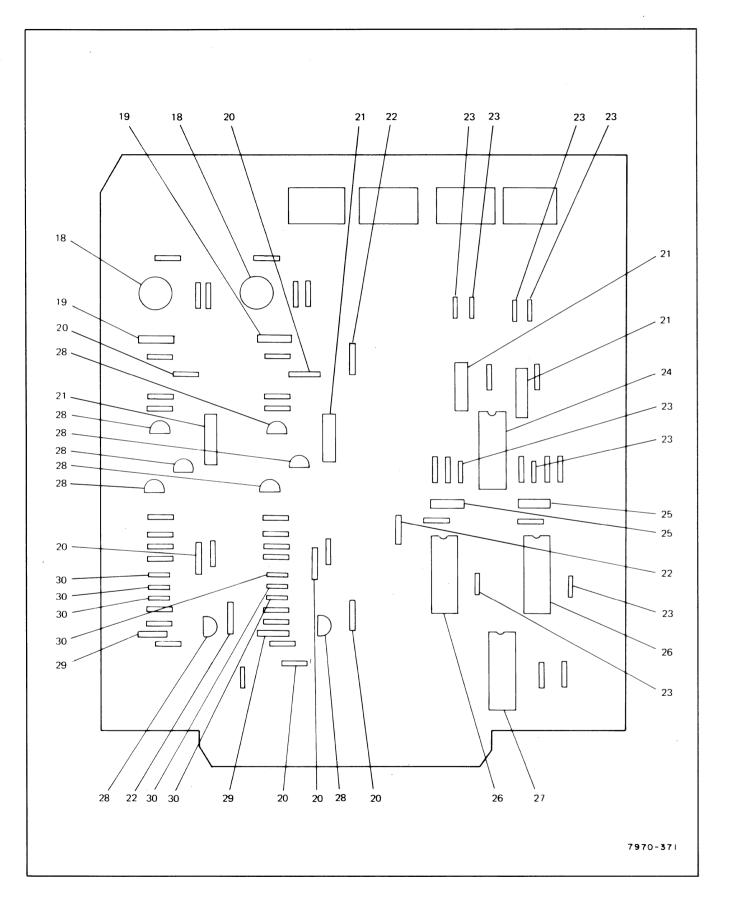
Dual-Channel Read Data Assembly (10 - 20.9 ips), Parts Location Diagram (Sheet 2 of 2)
